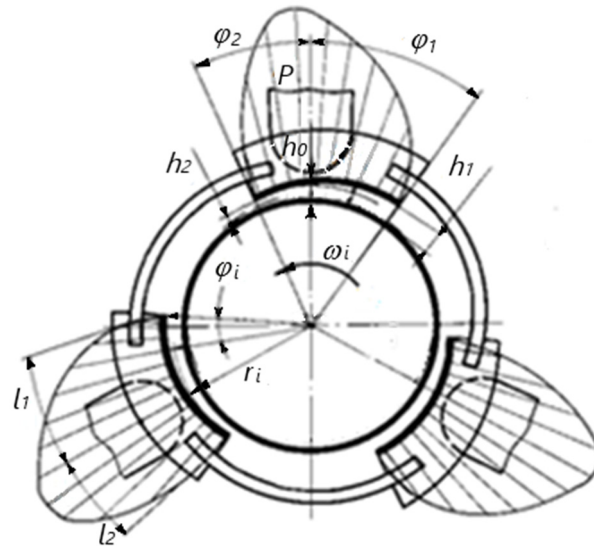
Tilting pad bearing calculation scheme: P —pressure; h_0 , h_1 , h_2 —oil film thicknesses; φ_1 , φ_2 —tilting pad angles; l_1 , l_2 —tilting pad lengths; r_i —radius; φ_i —angle; ω_i —rotor angular speed.
